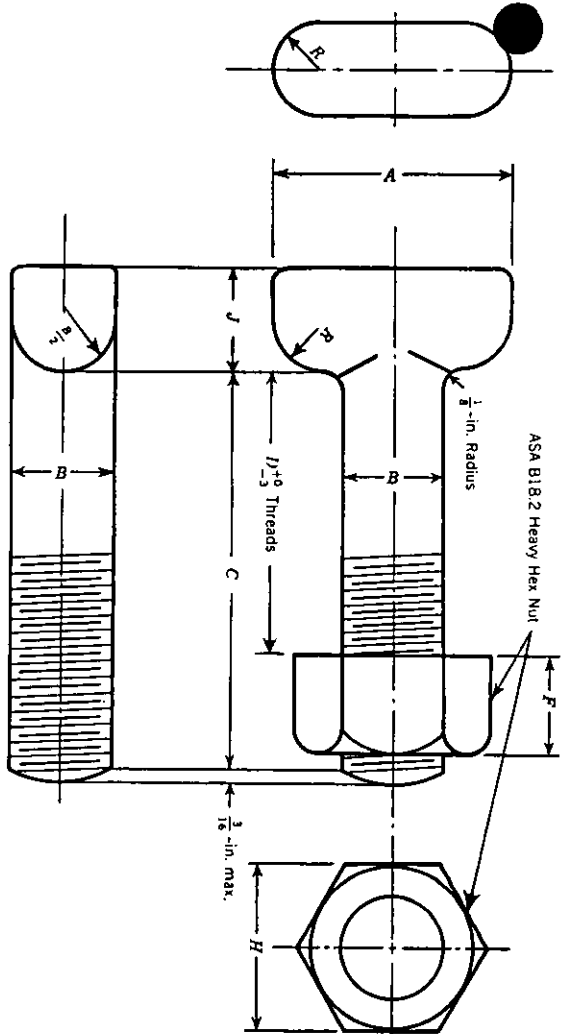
Mechanical-Joint Bolts and Nuts
